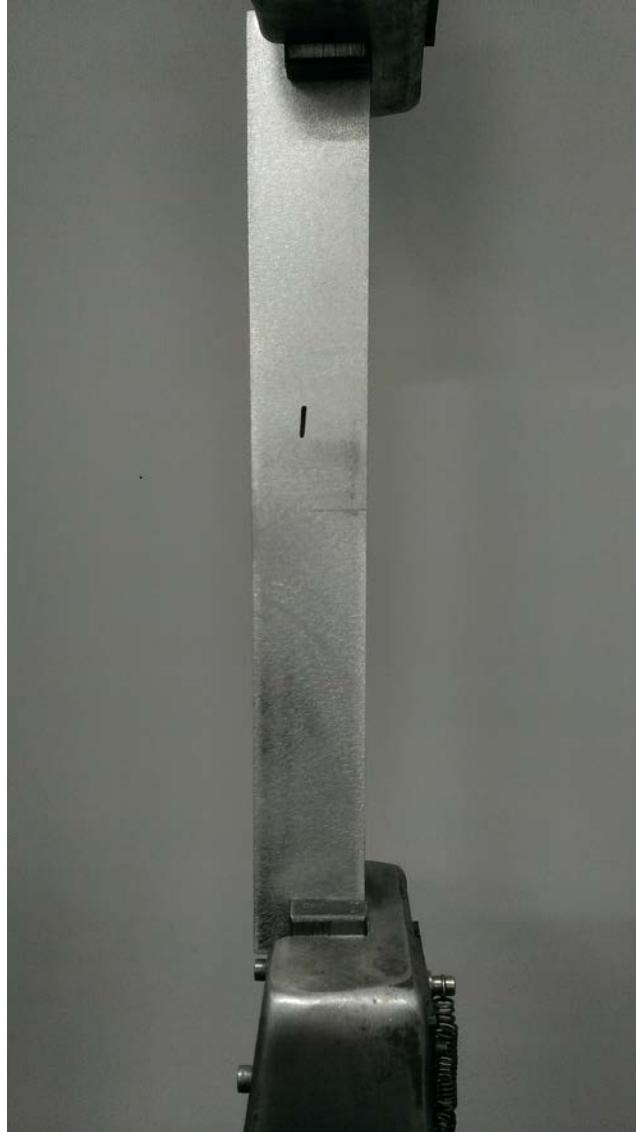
Picture showing location of loading grips and offset of sample to obtain a bending moment
